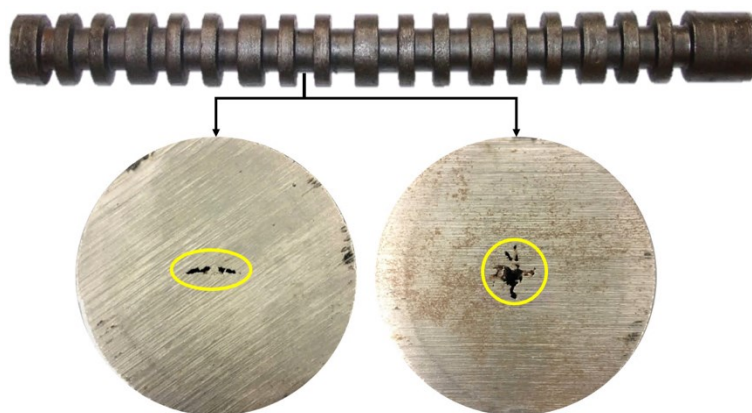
Central cracks observed in a cross wedge rolled automotive camshaft.
